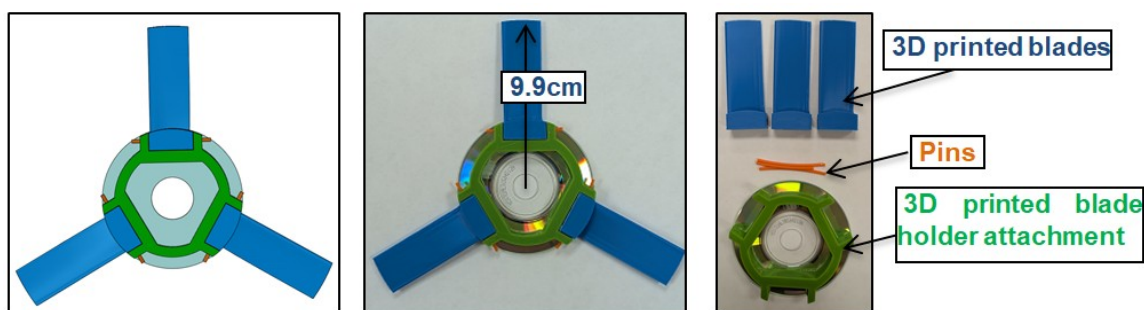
Blade assembly (from left to right: CAD assembly model, actual blade assembly, 3D printed parts)
